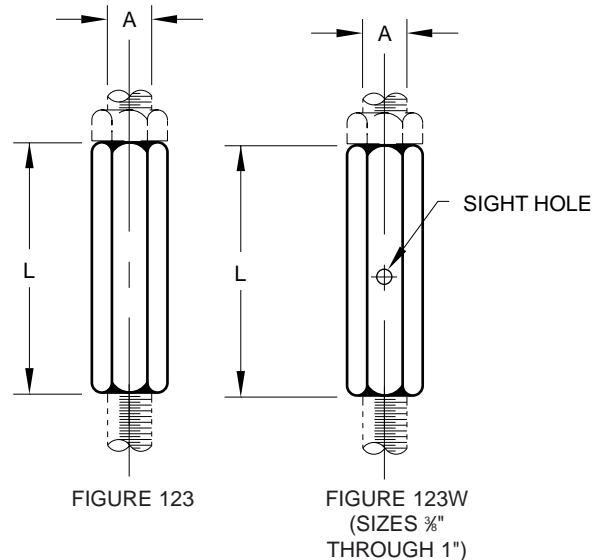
is used to connect rods up to 1½ inch diameter. The Rod Coupling is made of carbon steel and can be welded to the rod after assembly. The Figure 123W has a sight hole mid length to allow for determining depth of thread engagement.
